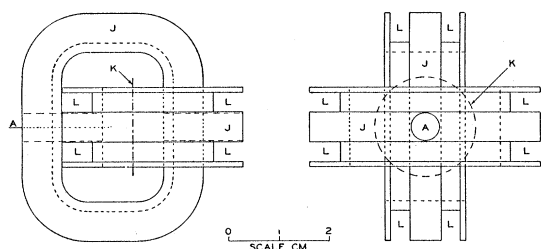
Side and axial views of the new search coils. Note the equivalence of the two rectangular sections and their positions relative to the stationary specimen. Forms are of hard rubber. A, axis of rotation; J, search coil form; K, specimen; L, channel for windings.
